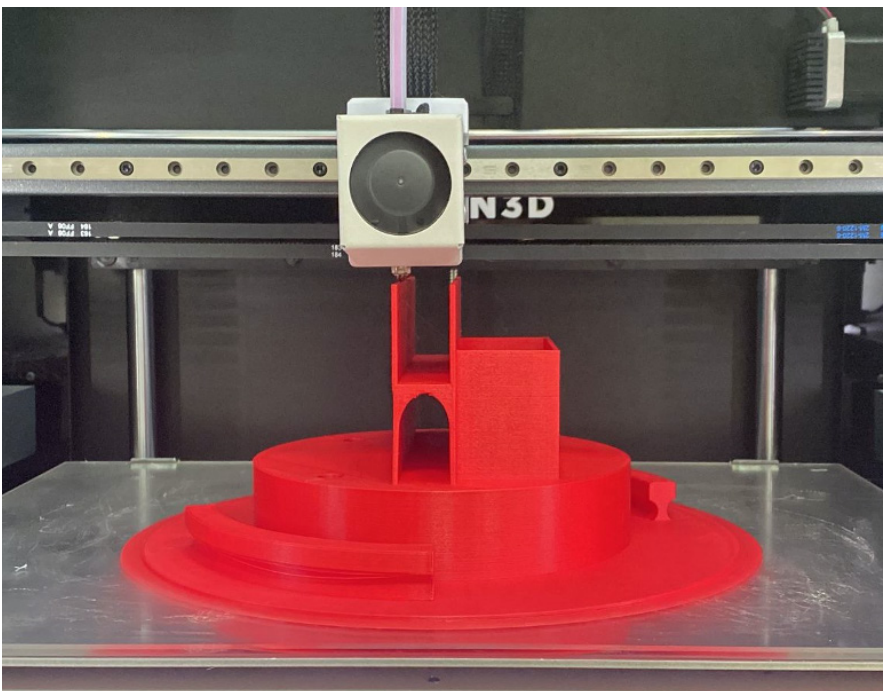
3D printing phase of the cabinet prototype: Photo by design team.
